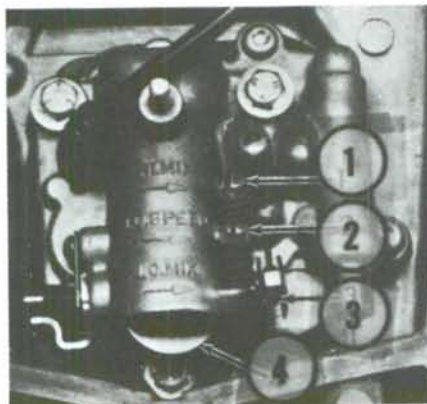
Air cleaner cover and filter element removed to show carburetor adjustment points of early McCulloch Models "W" series carburetor. Later models are similar except for high speed mixture screw.
